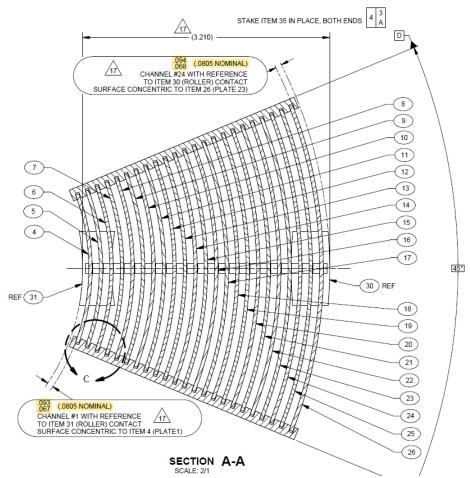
Drawing of MURR LEU with end channel gap (fuel plate to roller) highlighted [3]
